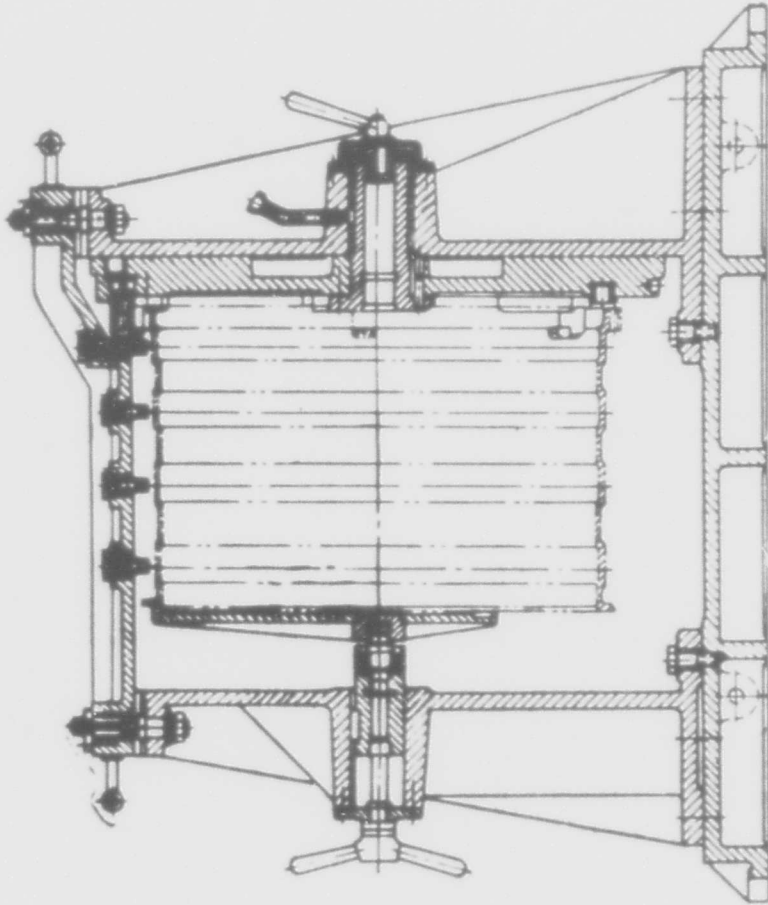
Drilling of radial holes in sections of a compressor housing and in a nozzle housing on a radial drill in a dividing jig with a fold-back positioner.
